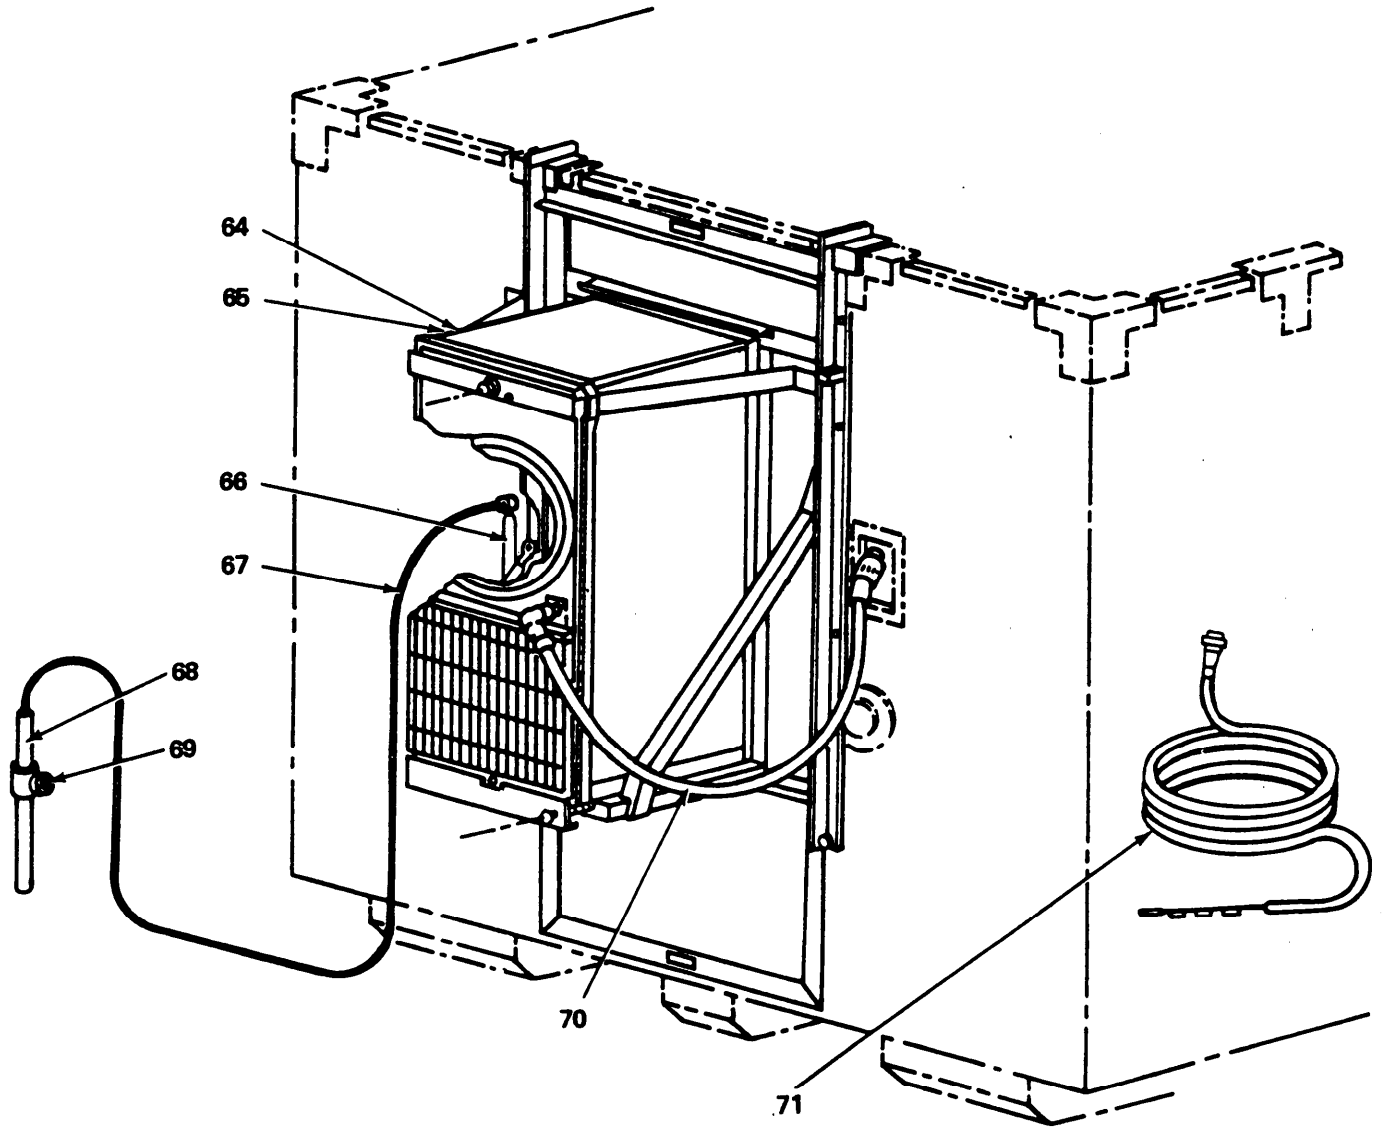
Air Conditioning Mounting Kit, S-389 Shelter (Sheet 3 of 3)
